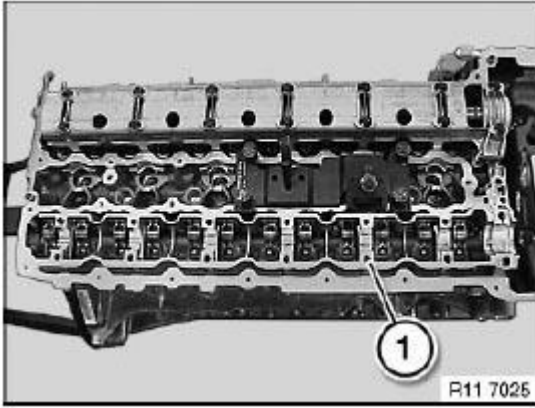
Identifying Lower Bearing Strip On Cylinder Head
